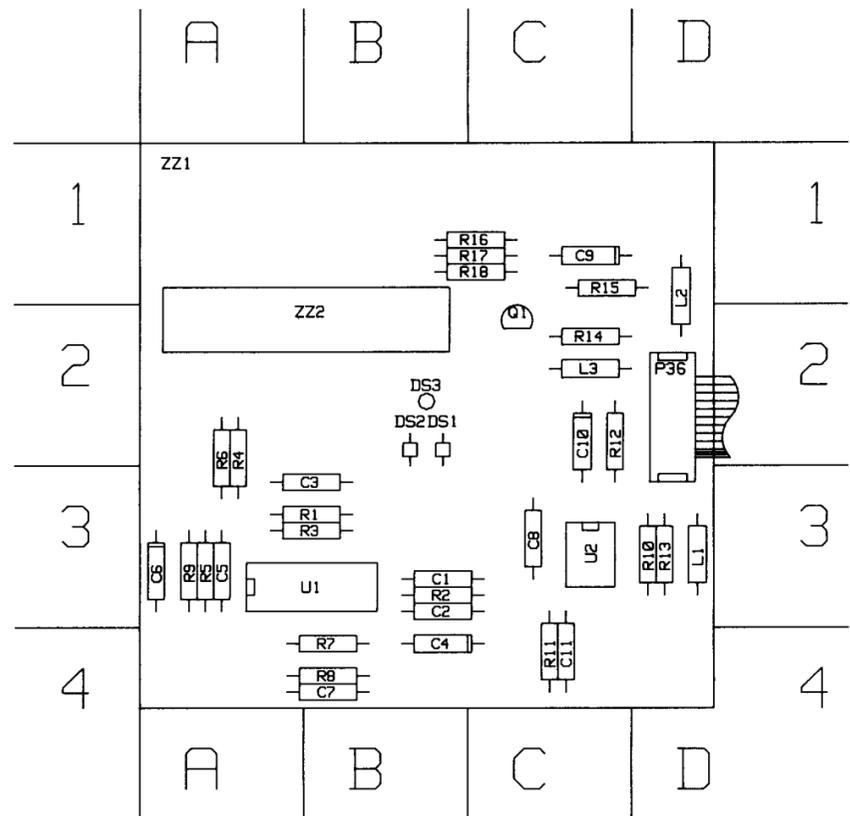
A1A1 Infrared Link Circuit Card Assembly Component Locator and Schematic Diagram.
